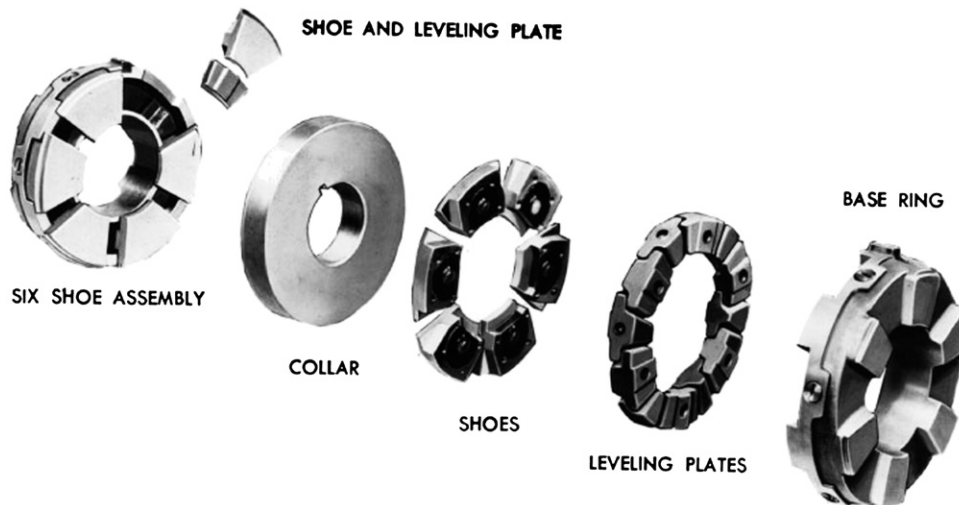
• Small Kingsbury six-shoe, two direction thrust bearing. Left-hand group assembled, except for one shoe and 'upper' leveling plate. Right-hand group disassembled (Courtesy of Kingsbury, Inc.)
